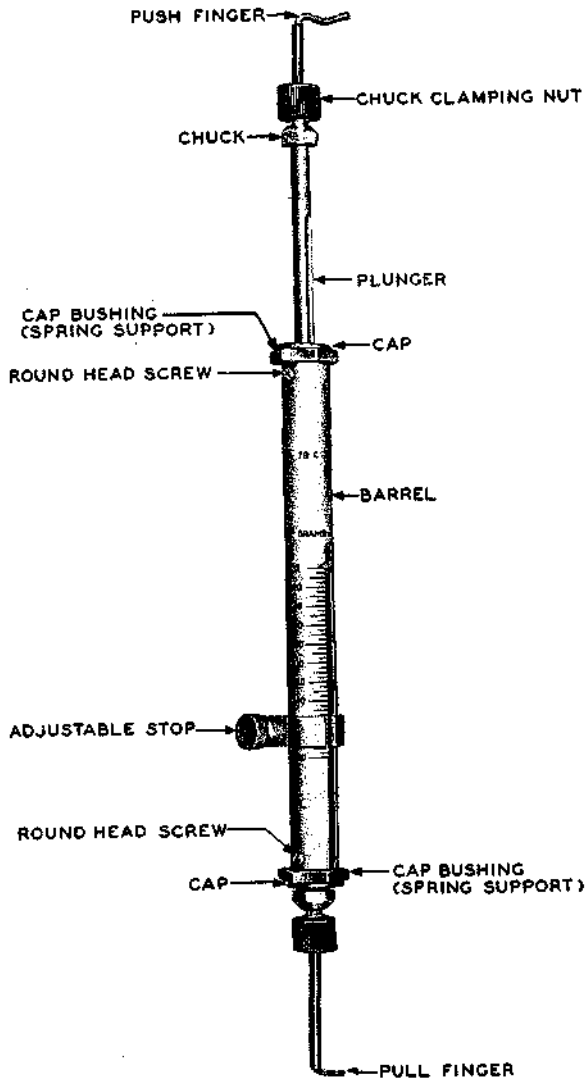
Designation of Parts of Nos. 79B and 79C Gauges
